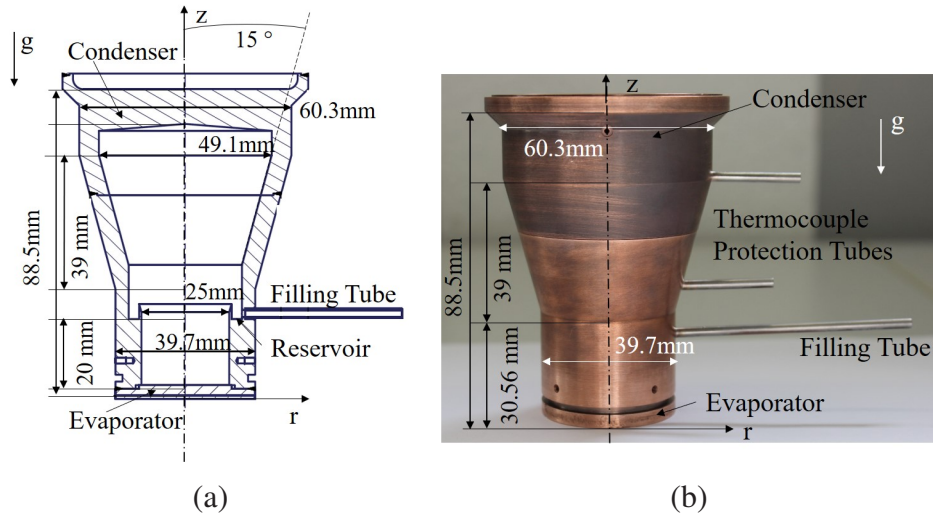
HPEE mock-up: (a) cross-section through the mock-up with dimensions, (b) photograph of the HPEE mock-up with a connecting head for the heat sink.
